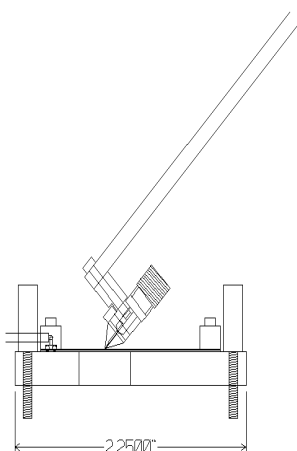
The design of a holder assembly with an angled probe housing. Variable angle is possible.
